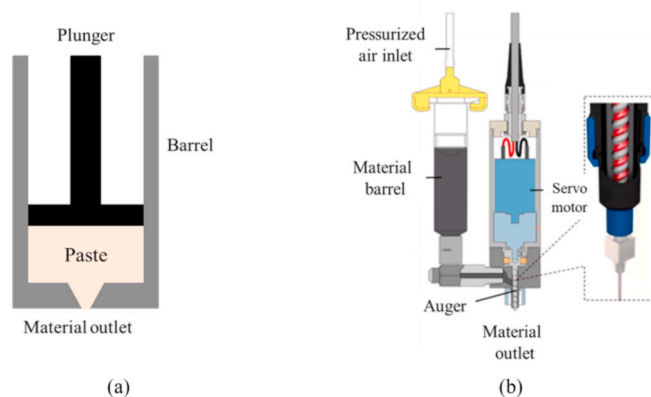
Two mechanisms used for the DW (a) Plunger mechanism, (b) Screw extruder mechanism [97].
